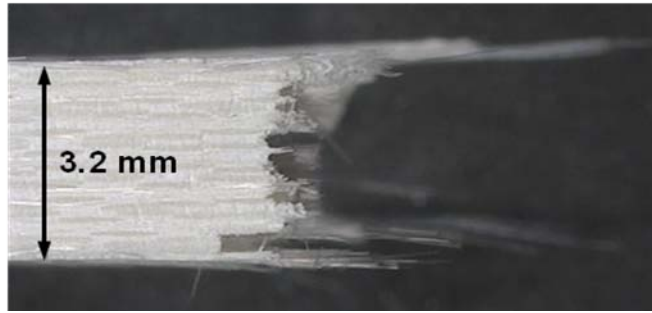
Fracture surface of the N720/AM specimen(2) tested in tension to failure with constant loading rate of 0.0025MPa at 1100°C in steam (side view).
